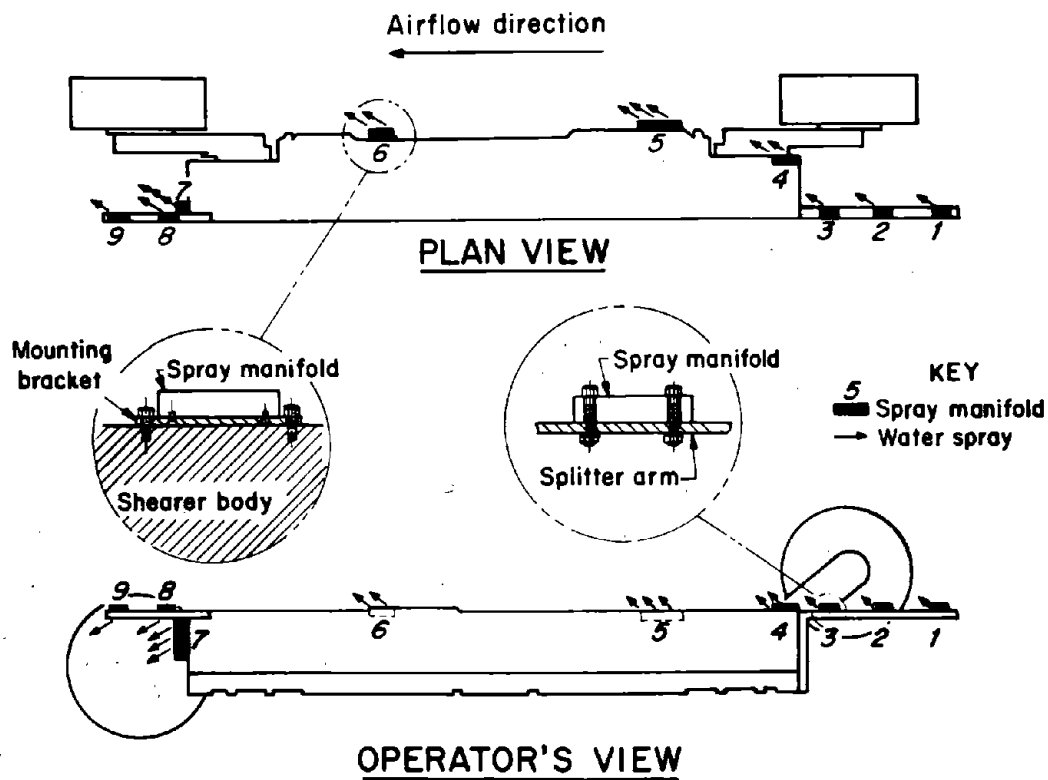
Location and mounting positions of spray manifolds on modified shearer clearer system. All dimensions are in inches.
